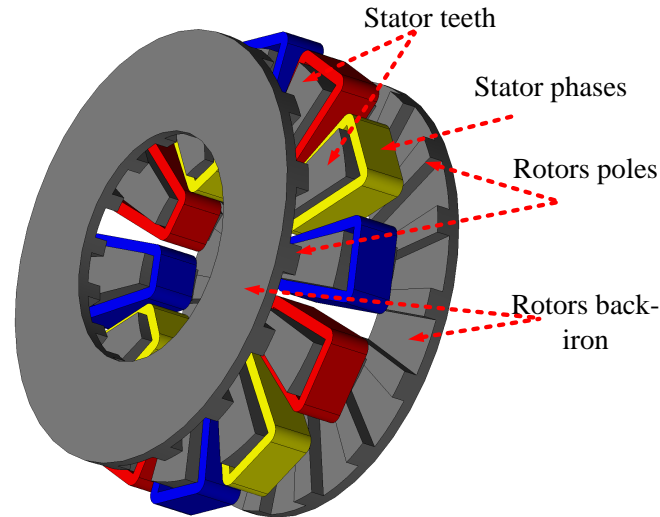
A 12/16 dual-rotor single-stator toothed-rotor AFSRM
